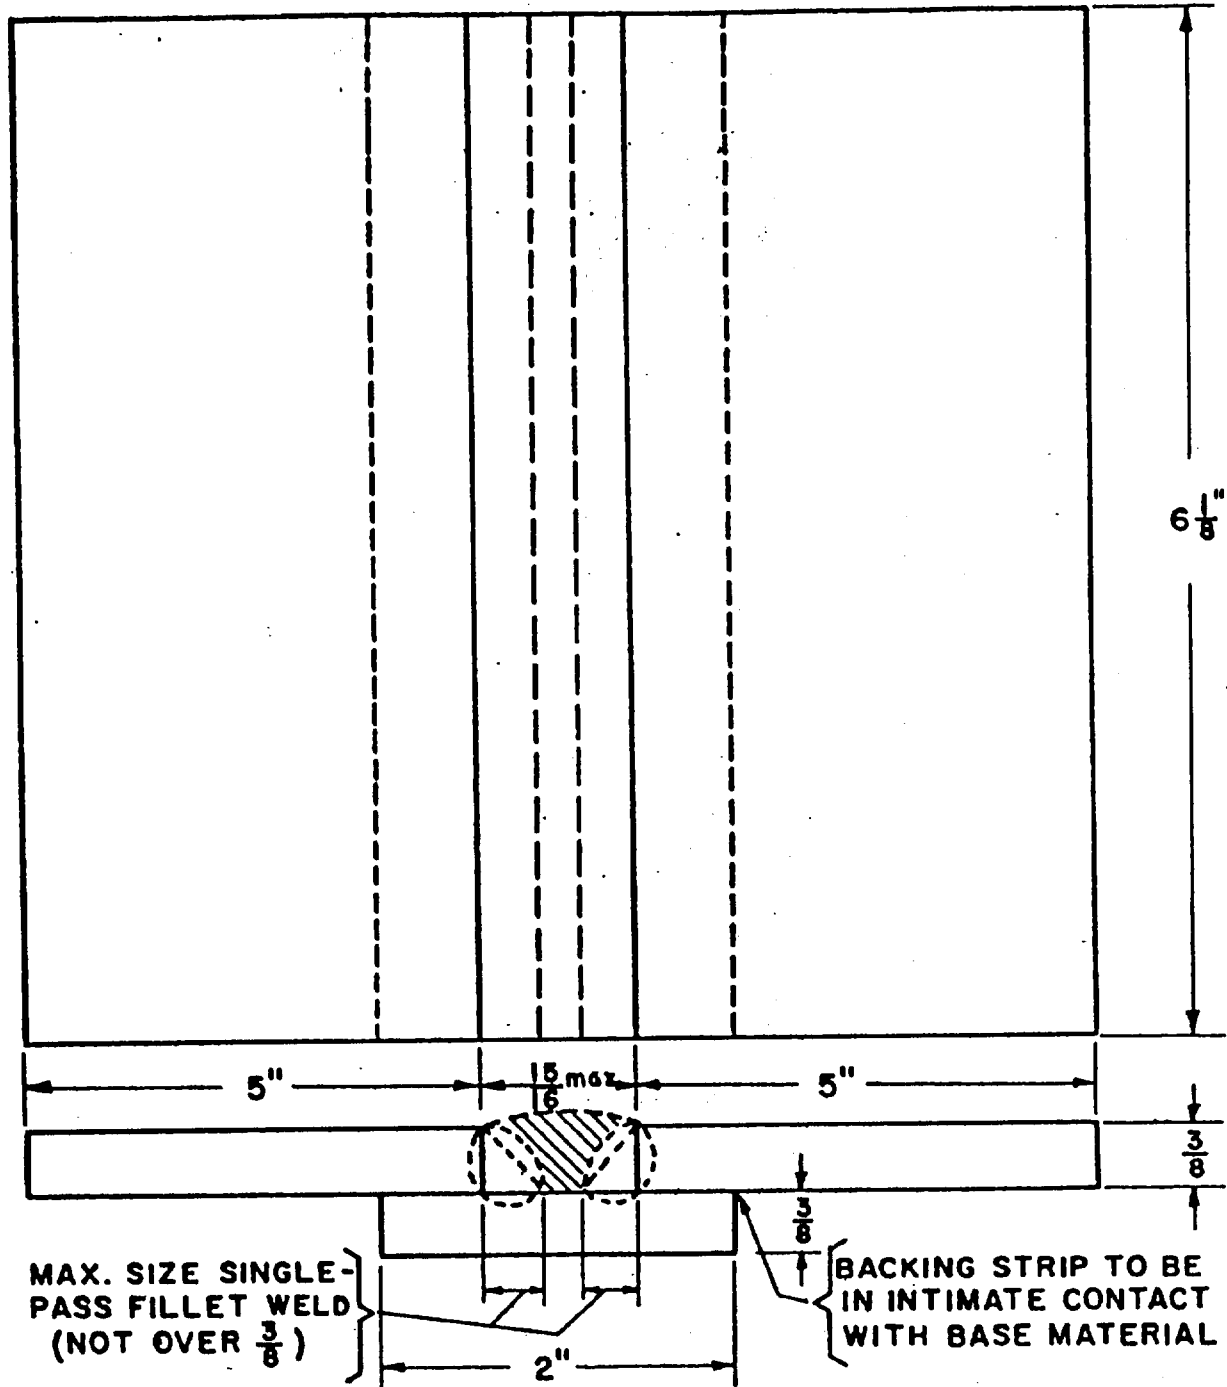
Fillet weld test specimen for qualification of welders or welding operators.
